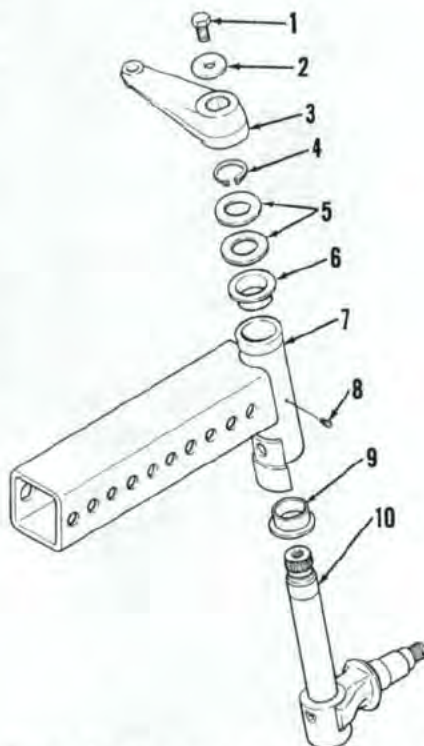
Exploded view of steering spindle assembly typical of all models.
